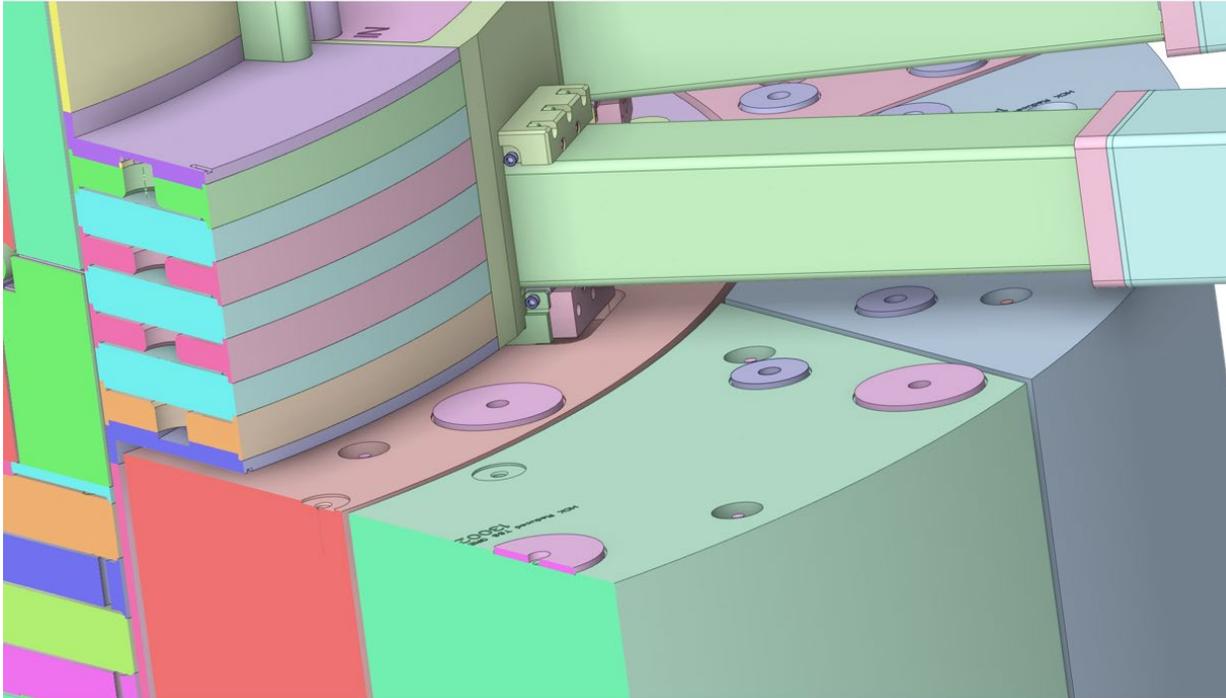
Detailed view of bulk shielding layer 1 and CV with nozzle extensions installed
